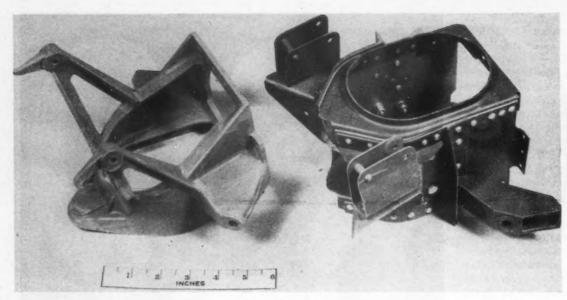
The 356-76 casting shown at the left replaces a very complicated built-up part shown at the right. The original part consists of 18 individual parts held together by bolts and rivets.
